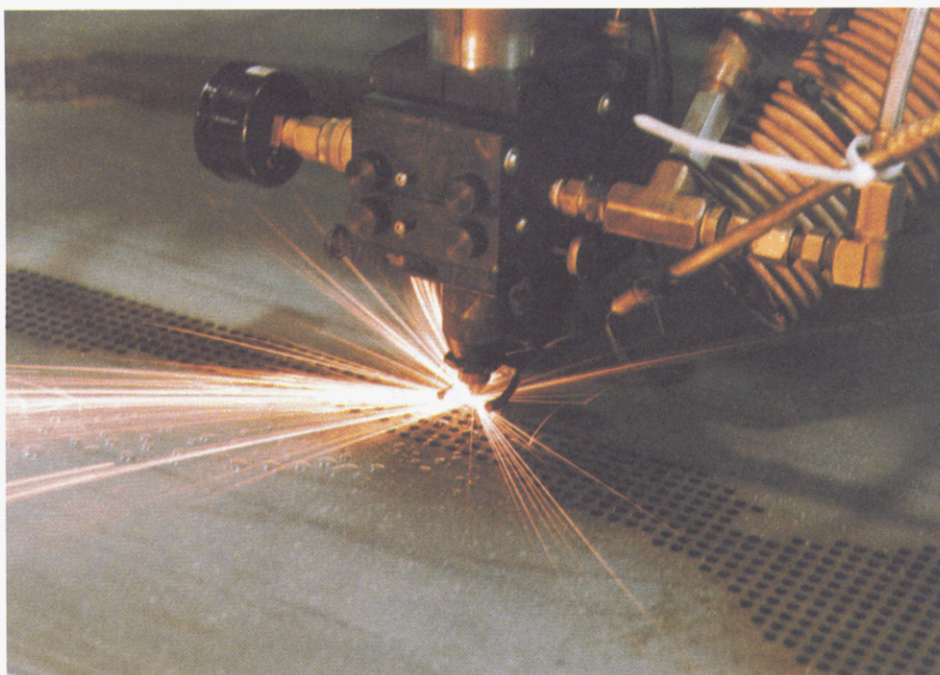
Photograph of a CO₂ Laser Cutting 6 mm (0.25 in.) Thick 4130 Steel
